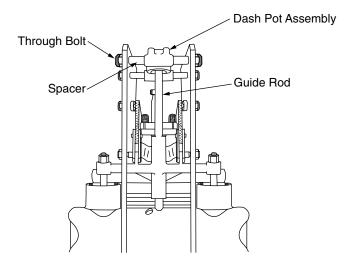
Moving dash pot to allow removal of moving contact arm assembly.
